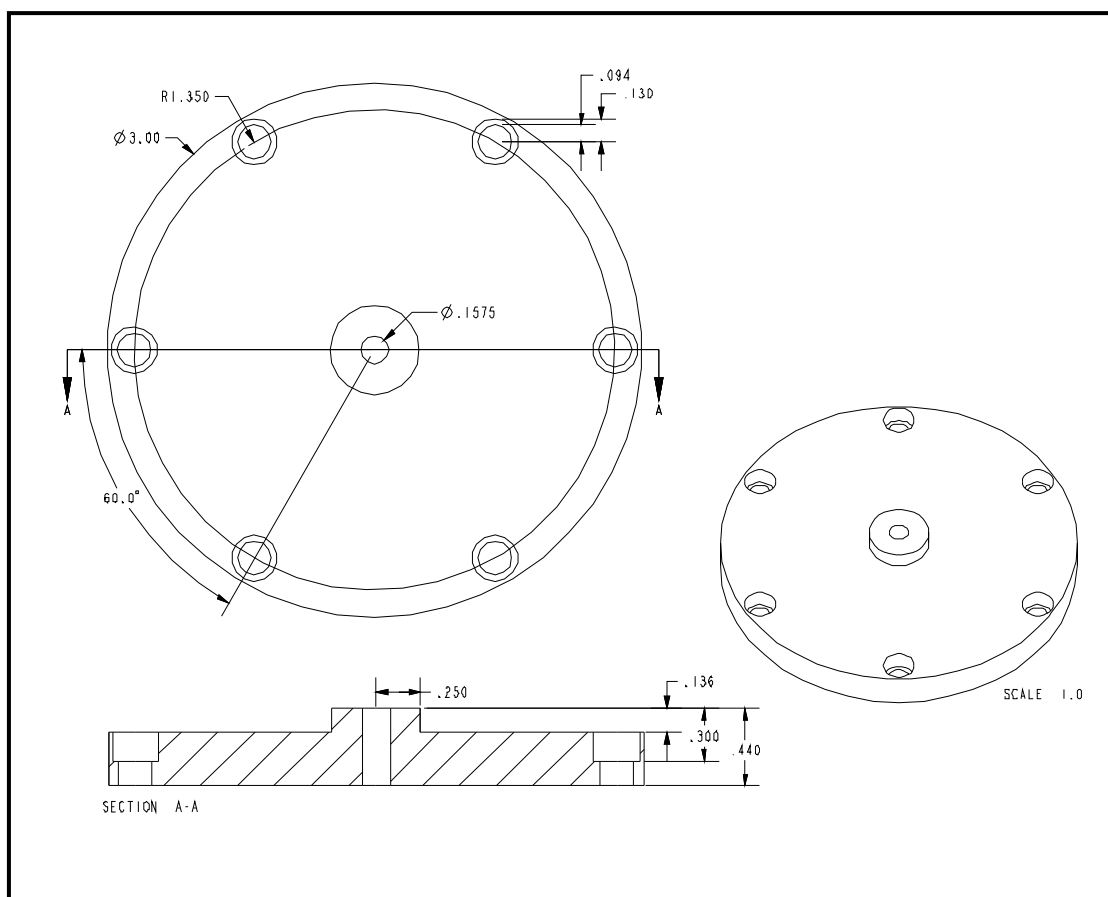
CAD Drawing of the Single, 4 mm, Straight Channel, Centered Jet Nozzle Block used for the 2nd Generation Injector (Filename: secondgen4mm.drw).
